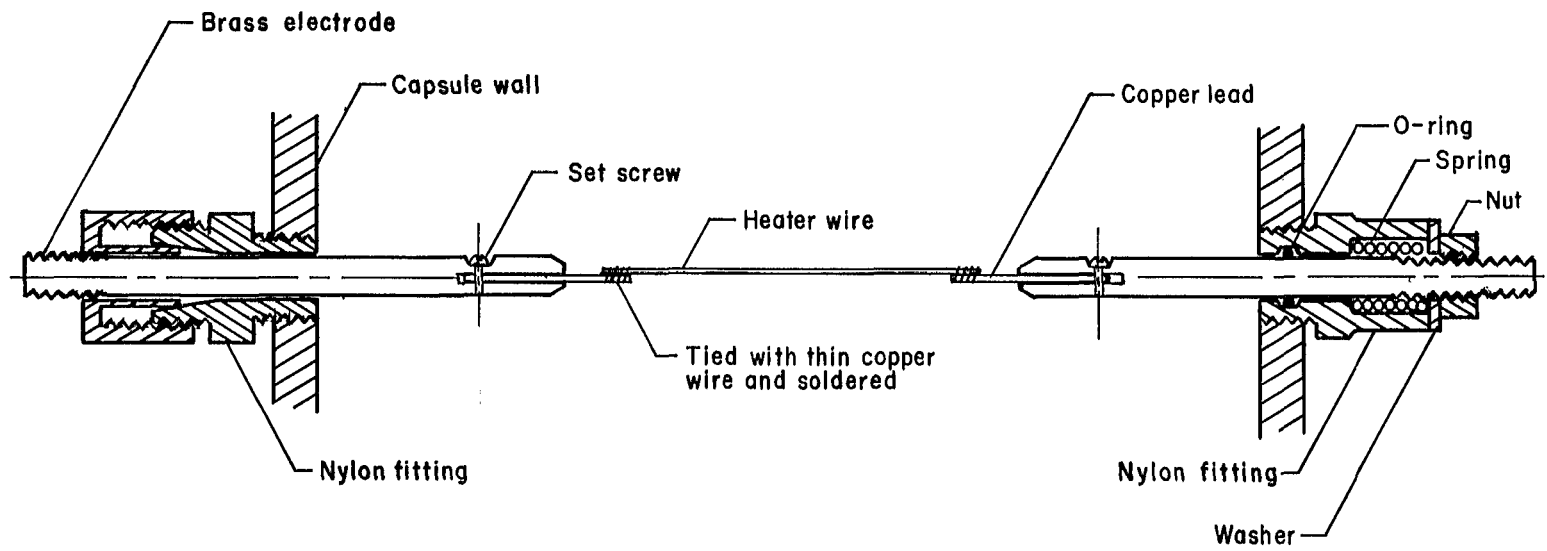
CONFIGURATION OF CYLINDRICAL HEATER WIRE ATTACHMENT
